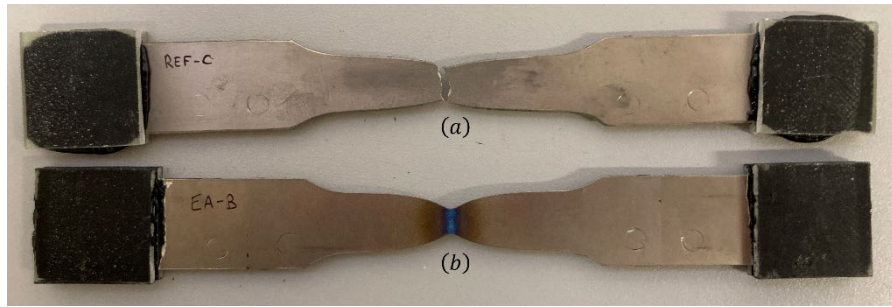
Post-fracture view of Reference-B and EA-C tested specimens.
